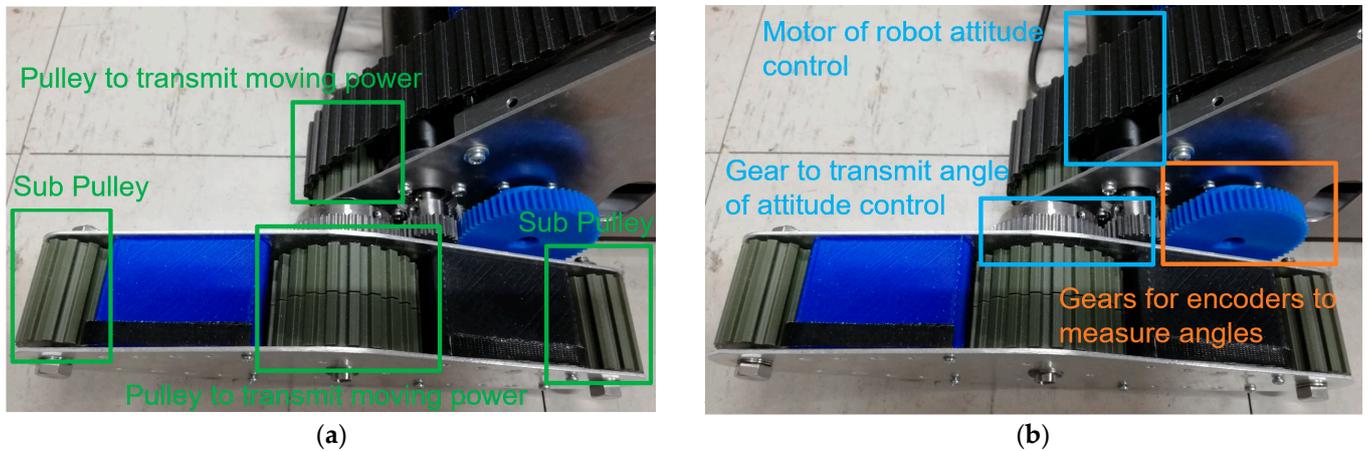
Unit for angle adjustment of undercarriage mechanism: (a) Parts related to belt power transmission; (b) Parts related to gear power transmission.
